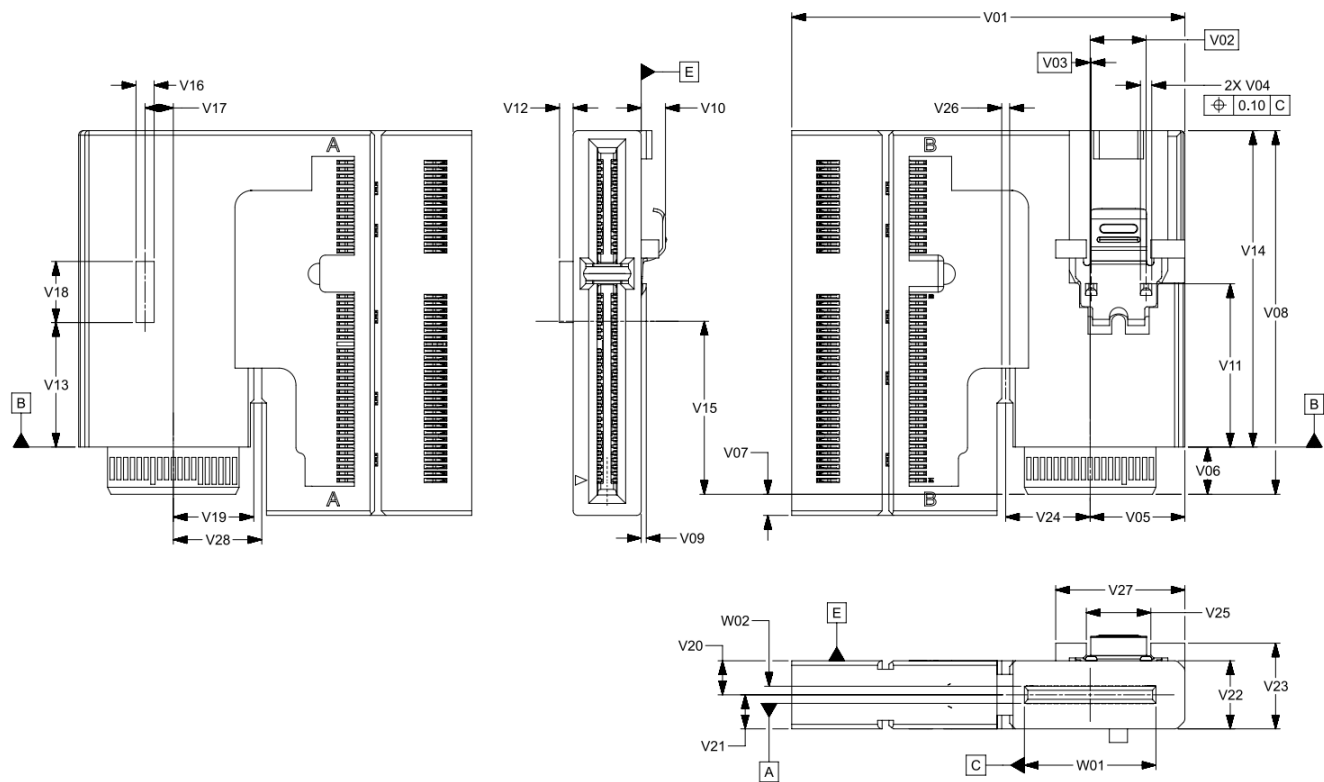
Dimensions of 38-Pin Style B Connector Plug E1-2C
